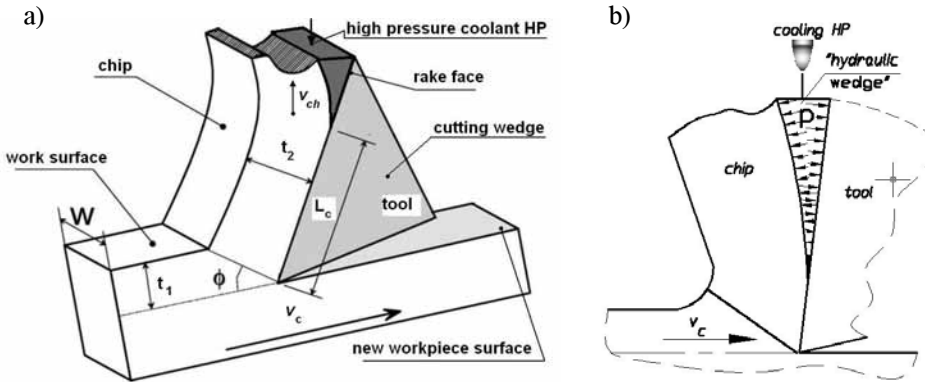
"Hydraulic wedge" of cutting-tool lubricant which assist in process of chip fracture
